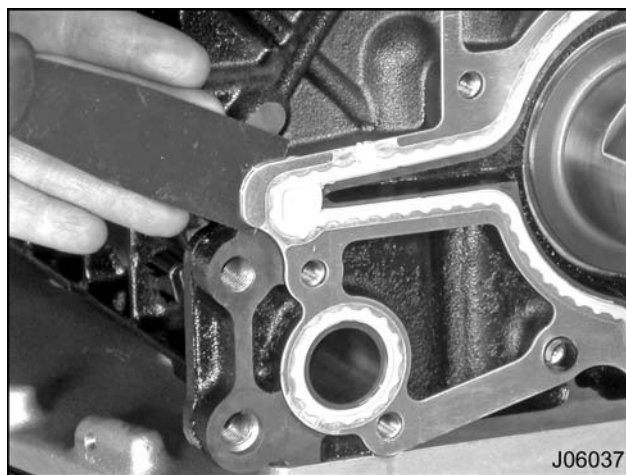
Cutting sealant between front cover gasket and upper / lower crankcase joint (condition 2)
